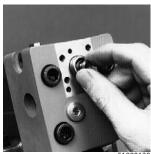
Install HC Control Start Adjuster Spring Seat
